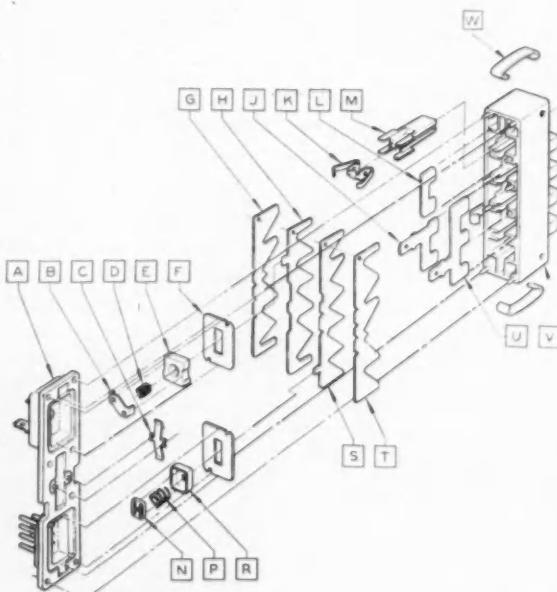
Assembly drawing of heater-air conditioning switch.
